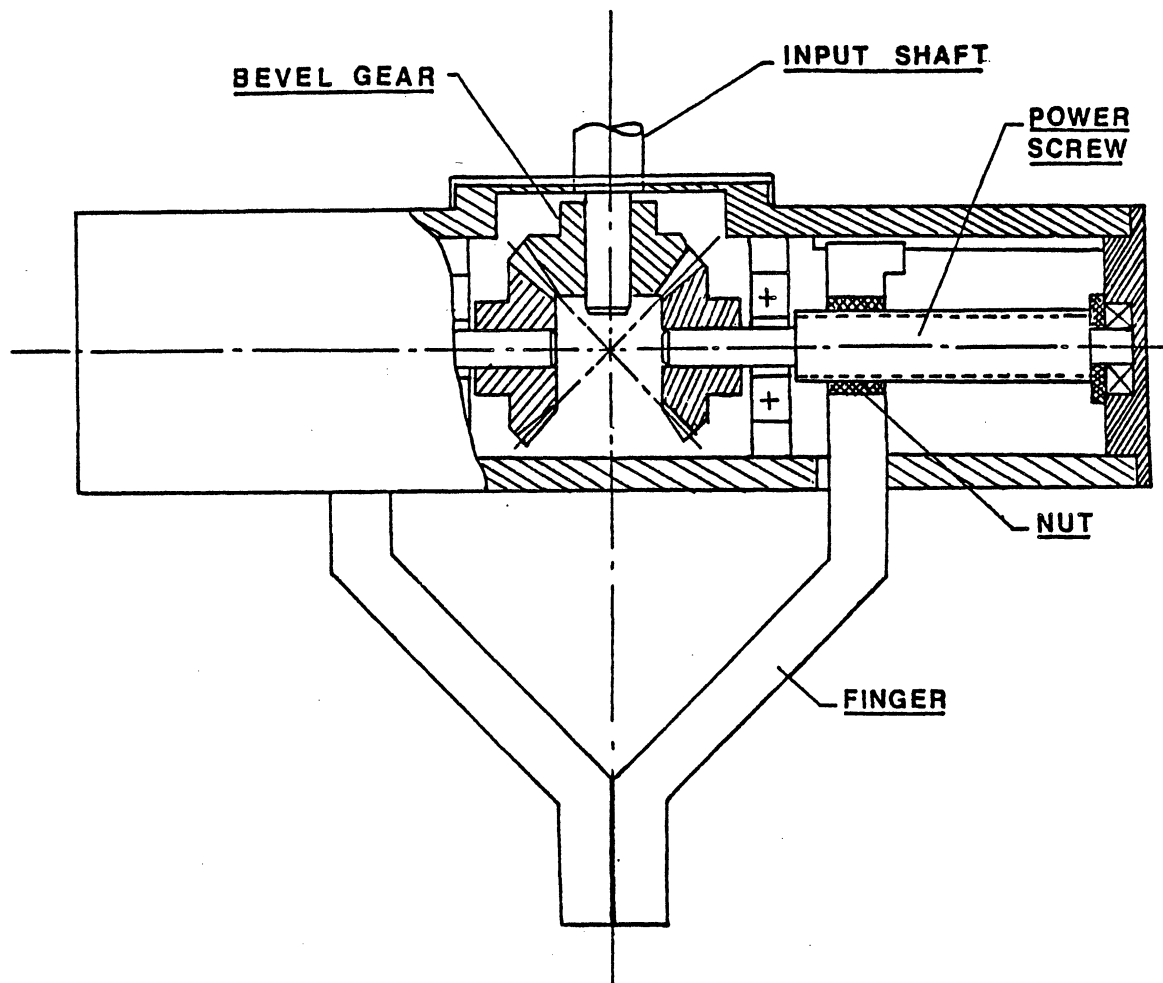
Cross sectional view of the gripper with some details omitted to expose gear and screw drive.
